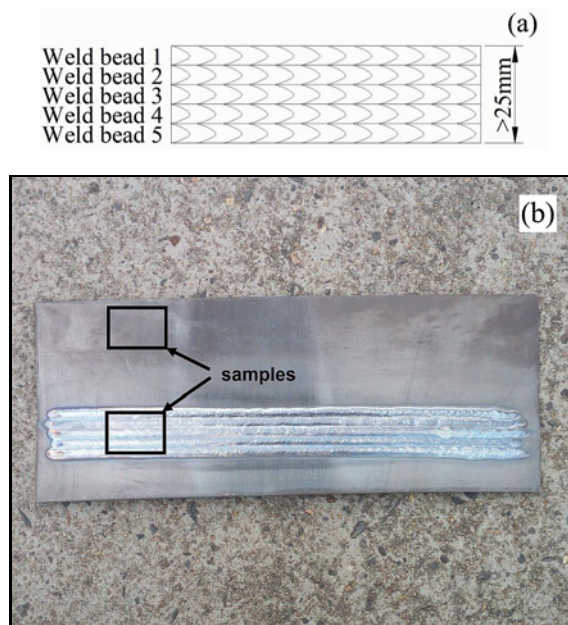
Distribution of weld bead in cold rolled sheet: (a) sketch, (b) photo.
